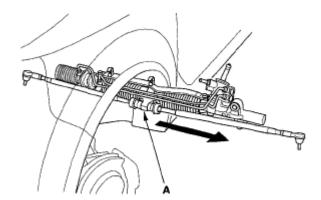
Identifying Pinion Shaft And Wheel Well Opening On Frame Courtesy of AMERICAN HONDA MOTOR CO., INC.
